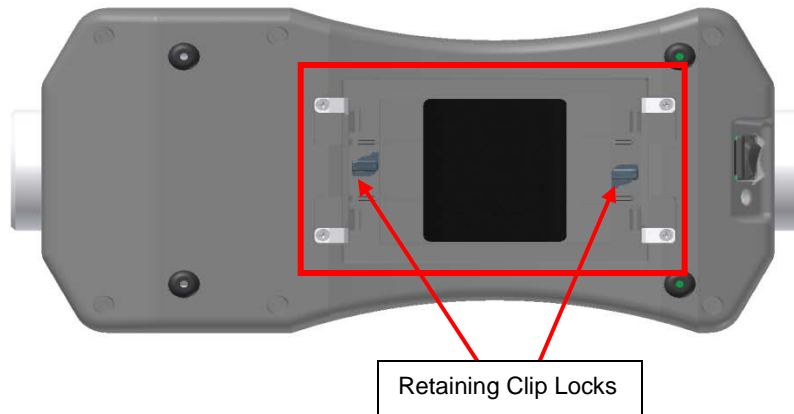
Profiler Electronics Assembly bottom view showing the location of removable battery pack outlined in red.
